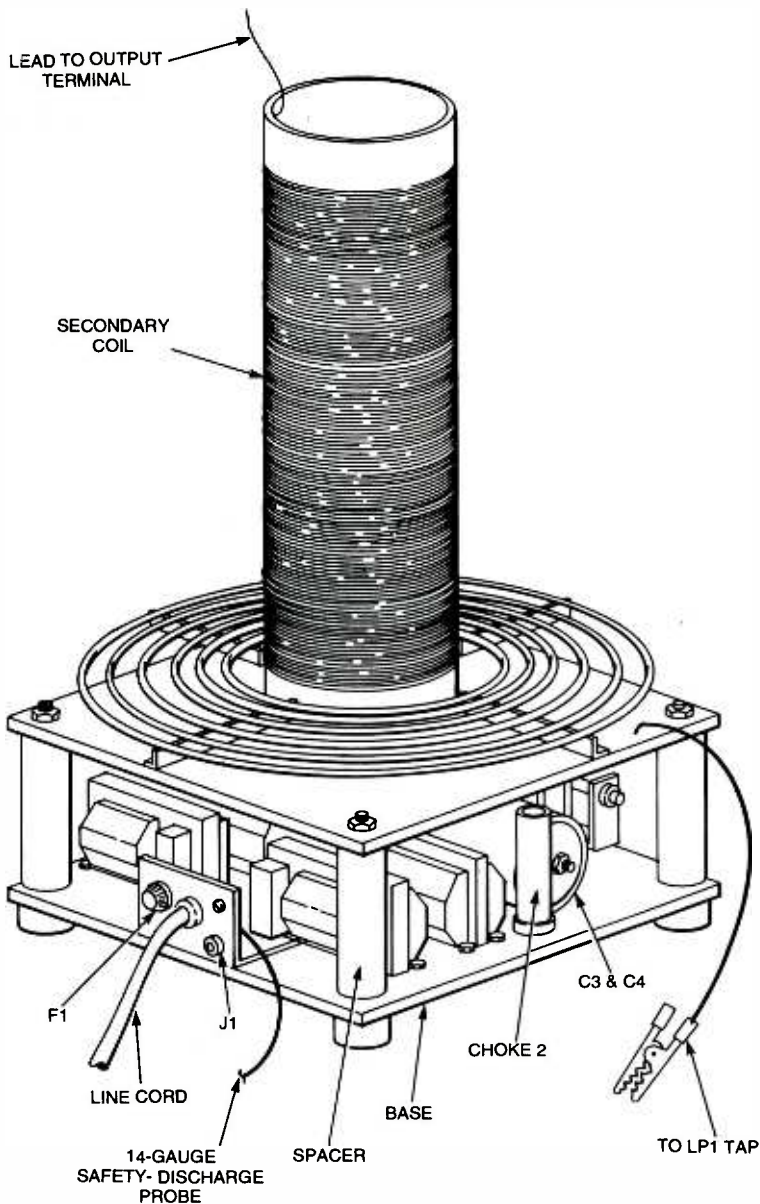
Overall look at the mechanical assembly of the Tesla Coil.
